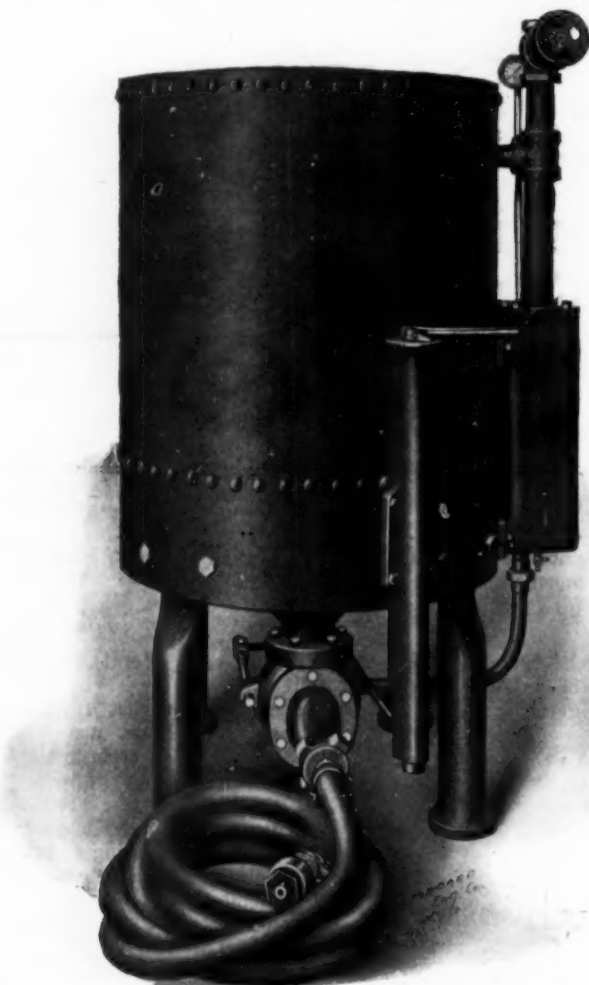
HOSE TYPE NEW HAVEN AUTOMATIC SAND BLAST MACHINE.
